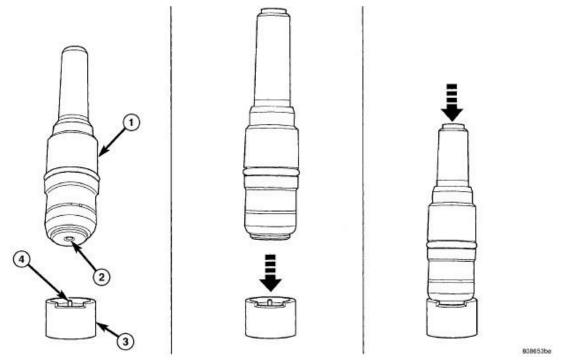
TIMING CHAIN TENSIONER - OIL PURGING Courtesy of CHRYSLER LLC
